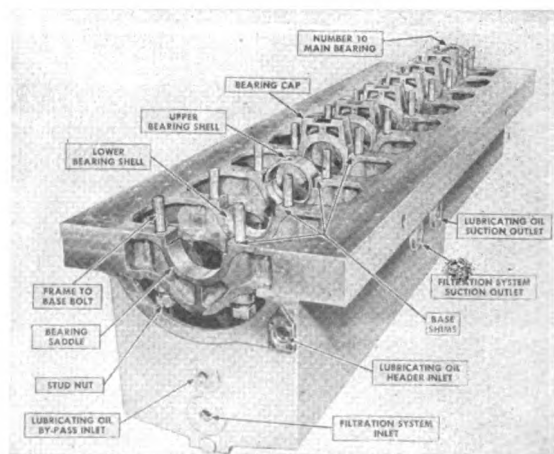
Engine base with main bearings and bearing caps in position, Cooper-Bessemer GSB-8.
